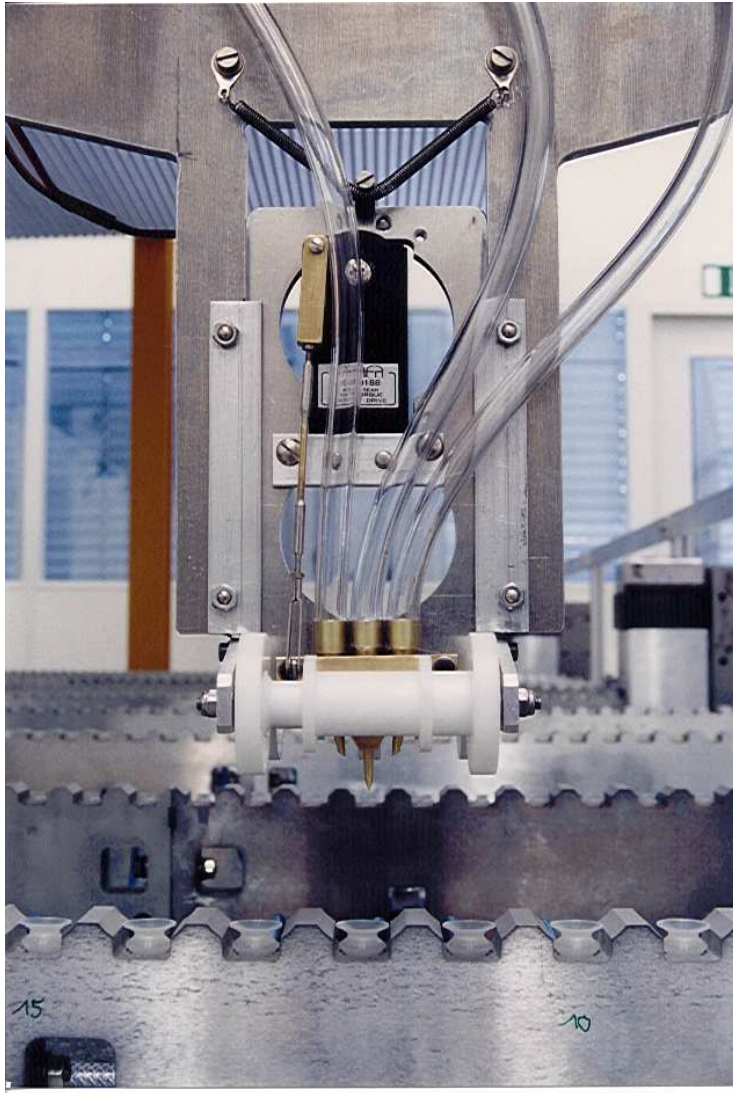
Pictures of the glue dispenser head used for the BOS prototype chamber.
